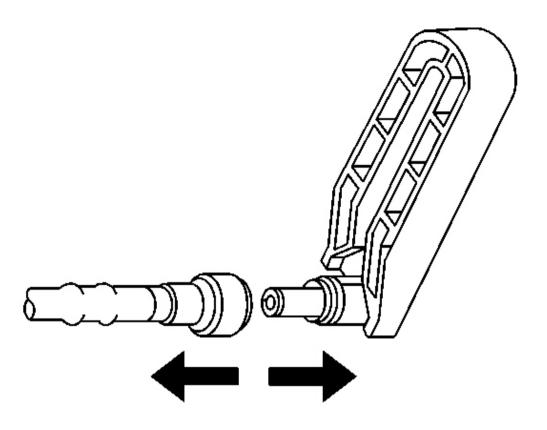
Pulling Connection Apart (Metal Collar) Courtesy of GENERAL MOTORS CORP.
